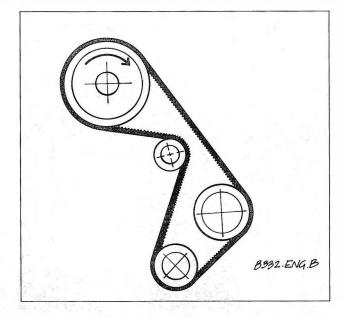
Camshaft drive belt configuration with tensioner and sprockets. Arrow shows engine rotation direction.
